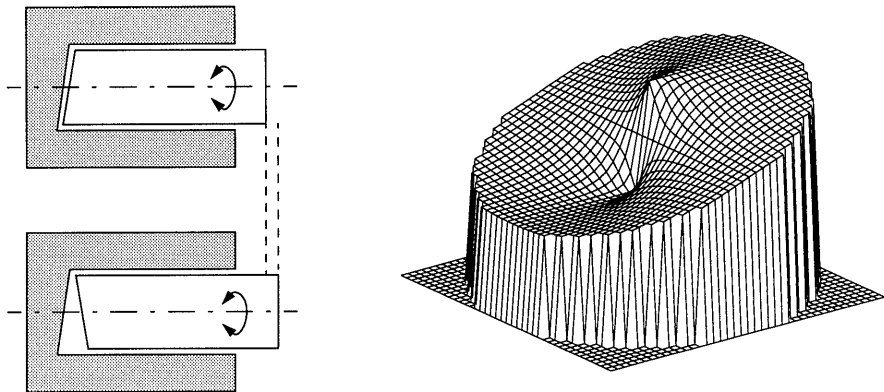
Alignment errors of the bearing surfaces cause axial error motions of the spindle (left), leading to a shape deviation of a face turned surface (right).
